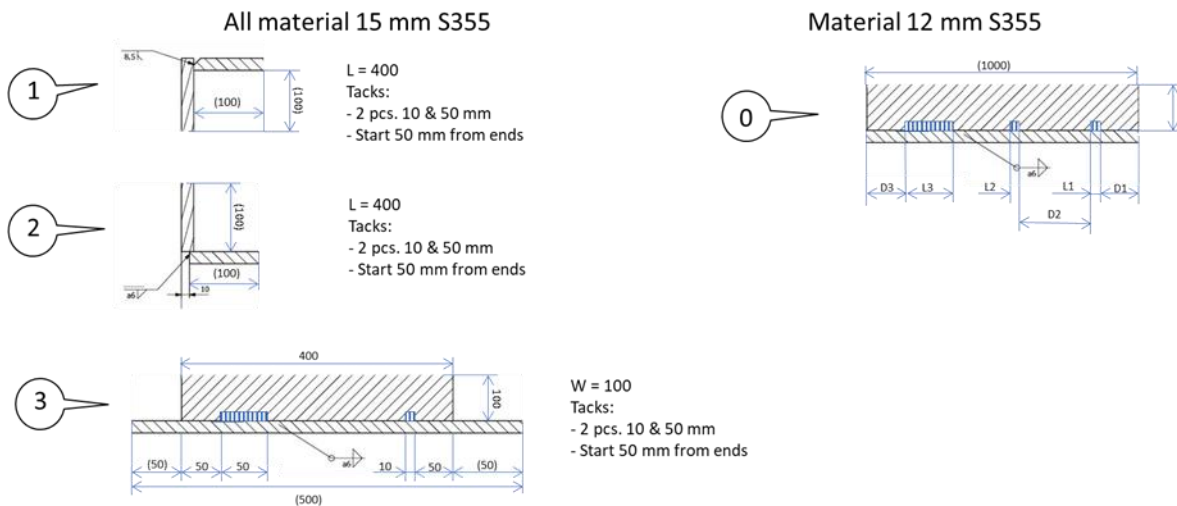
Small-scale specimen types for welding data collection. Air gaps and tack welds were included as artificial defect sources in some experimental series as well.
